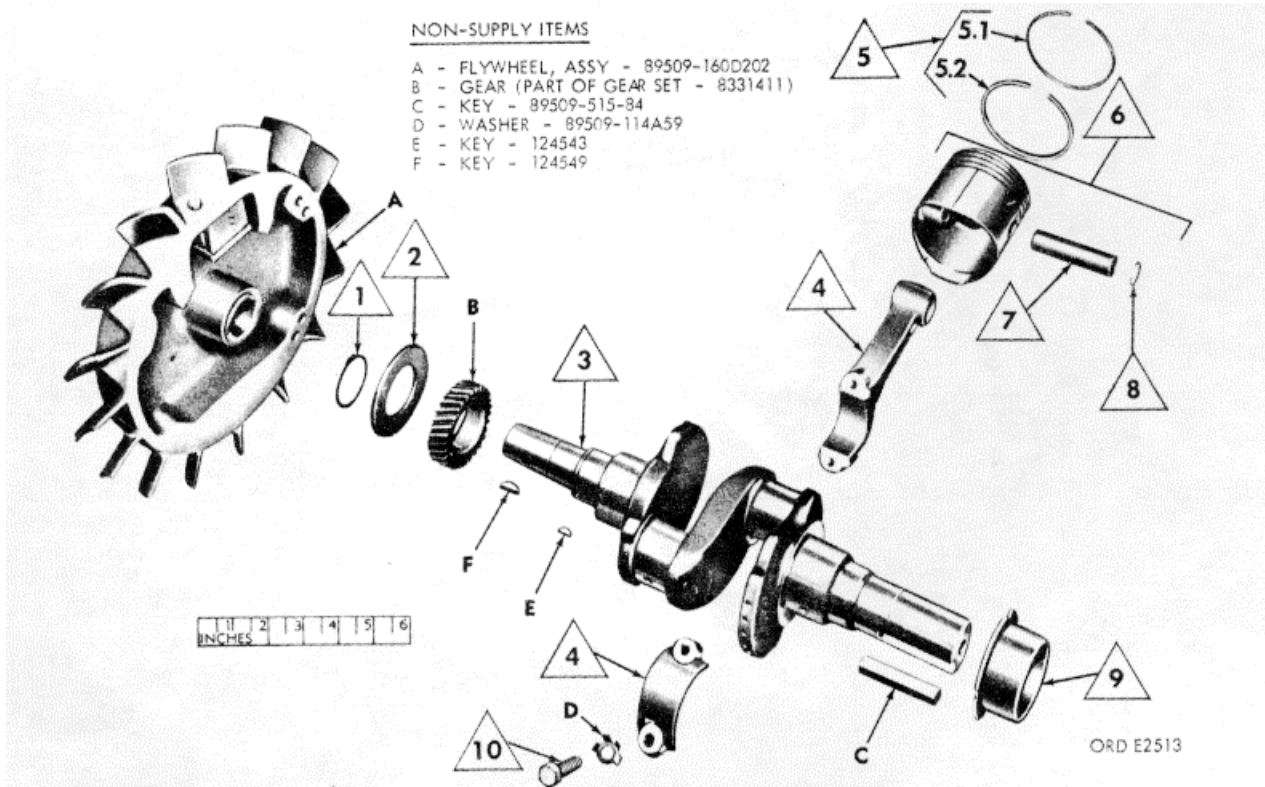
CRANKSHAFT, FLYWHEEL, PISTON AND RINGS.
